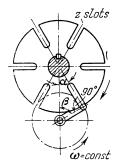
Diagram of a flat Geneva wheel mechanism with external engagement
